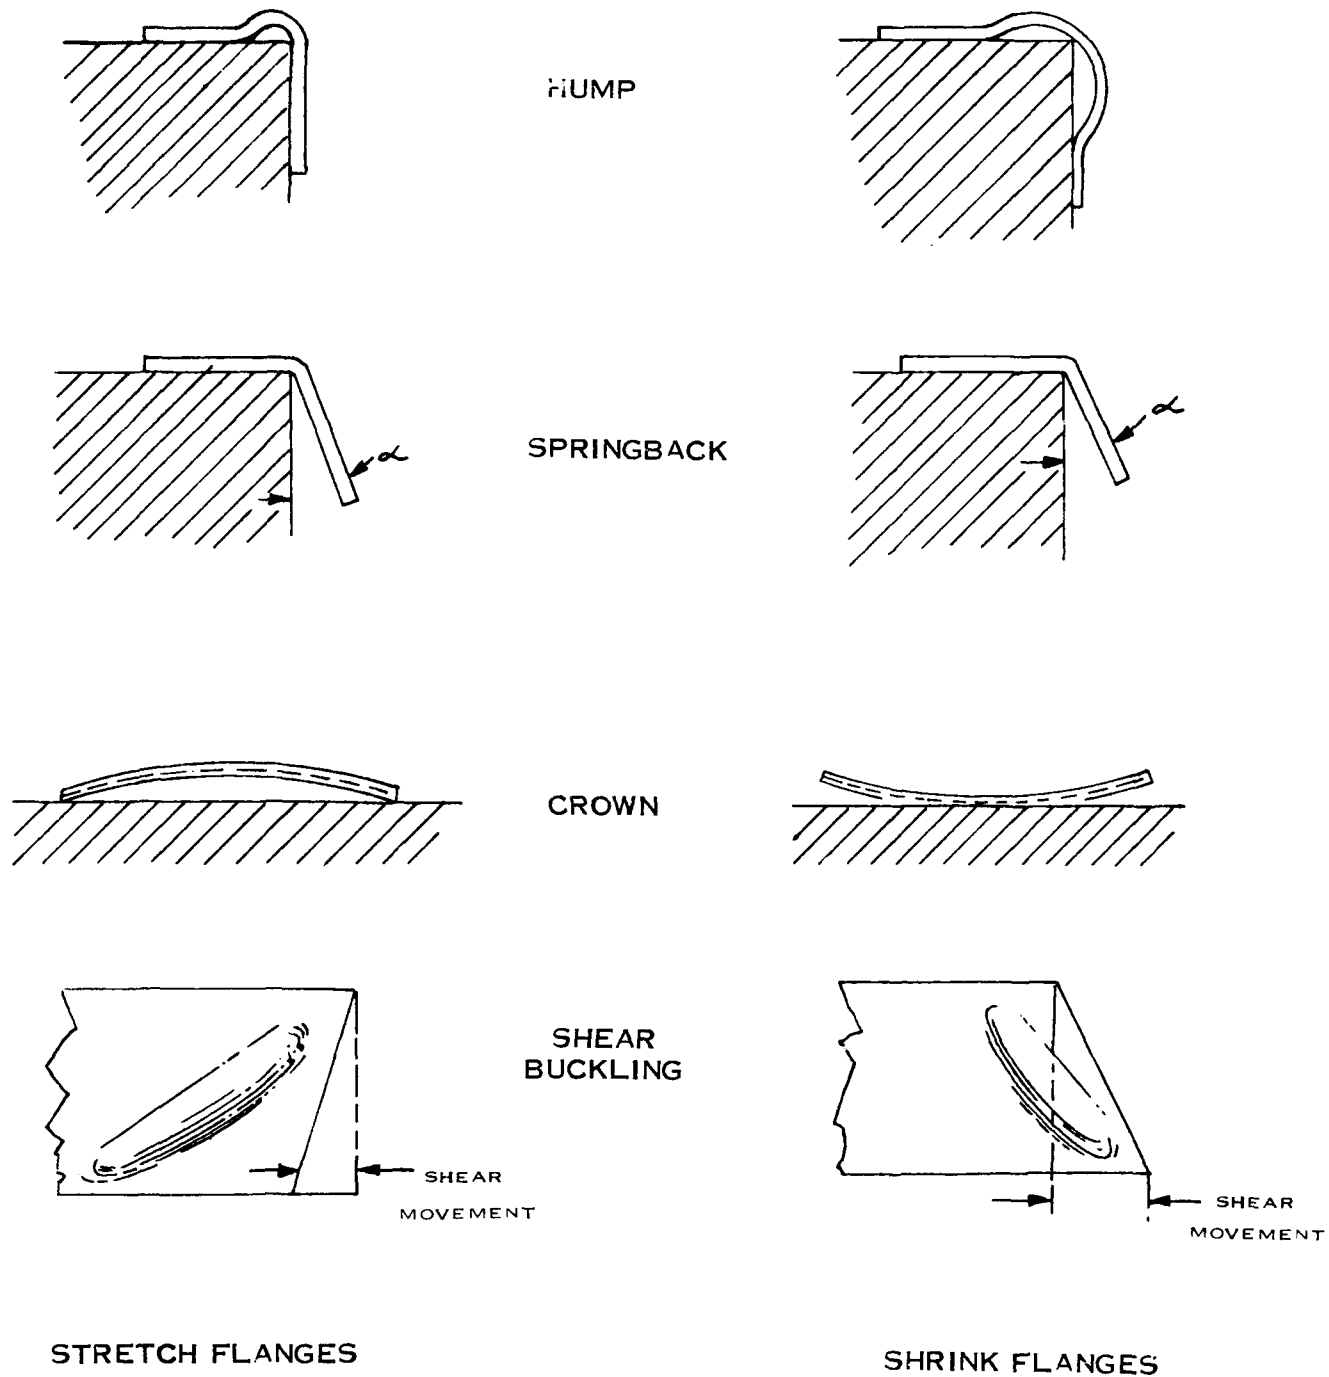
MINOR FAILURES FOR RUBBER FORMED STRETCH AND SHRINK FLANGES
